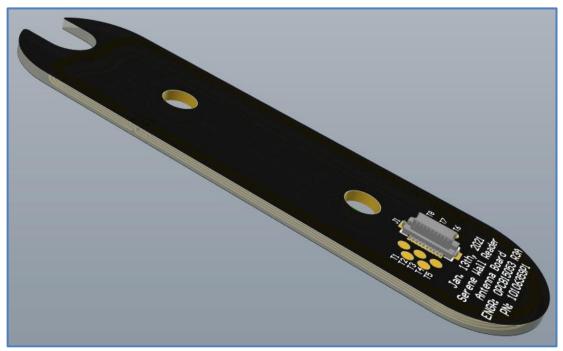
RFID Reader Antenna PCB electrical assembly with Connector
